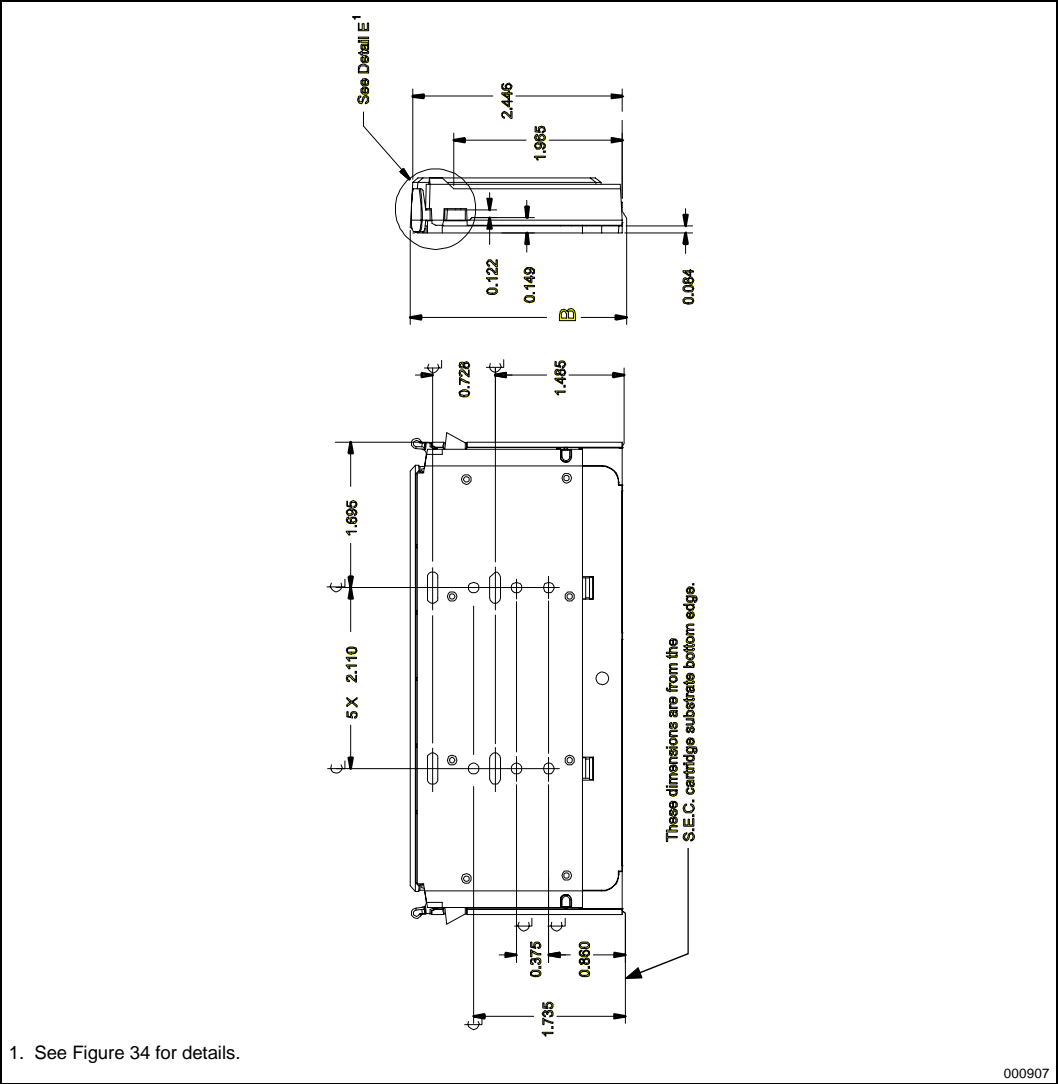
S.E.C. Cartridge Thermal Plate and Side View Dimensions
